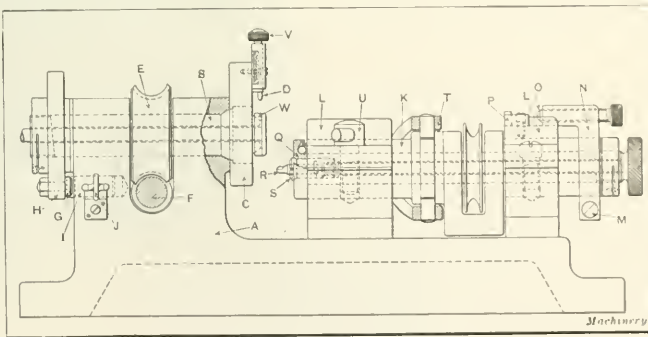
Special Machine designed for cutting Powder Grooves in Time Fuse Rings for Shells
